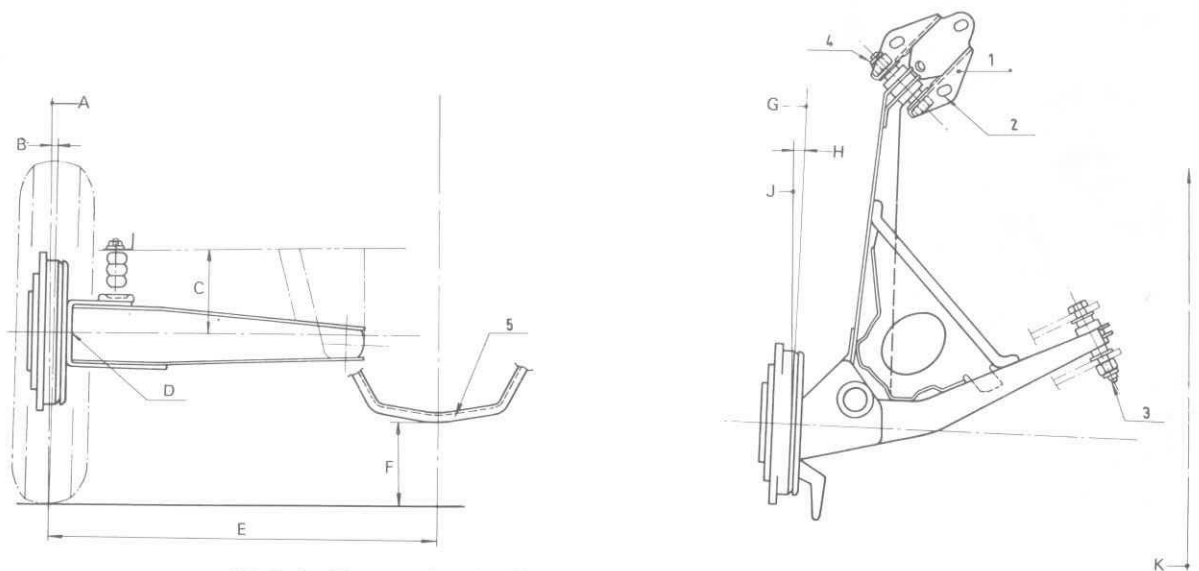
8 Diagrams for checking rear wheel camber (left) and toe-in (right)
